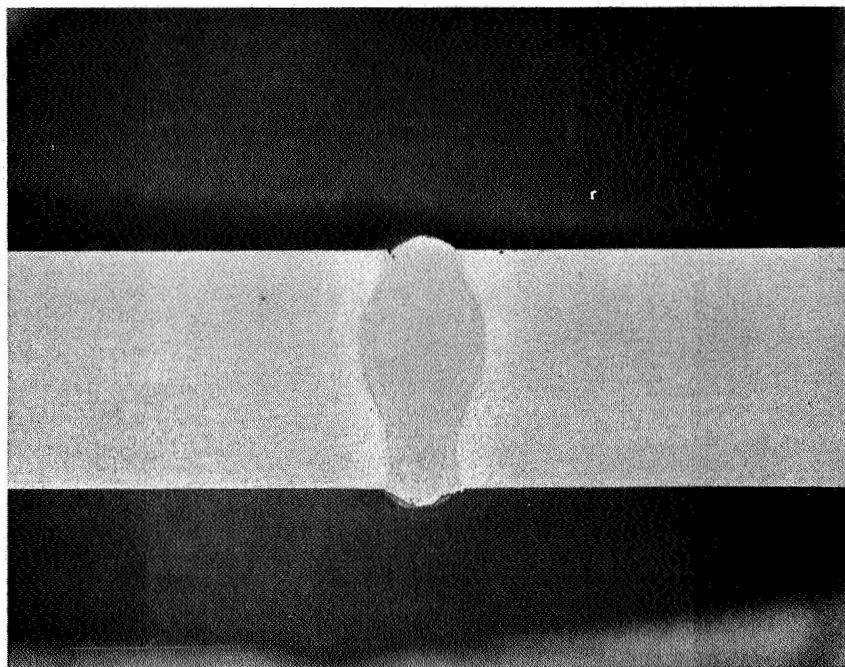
Weld Cross Section and X-ray Photograph of Weld No. 374,
